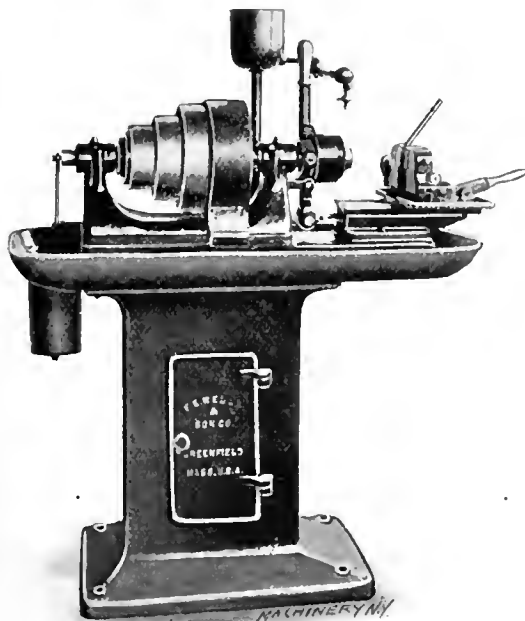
A Combined Tapping and Threading Machine for Diameters up to $\frac{5}{8}$ Inch.
